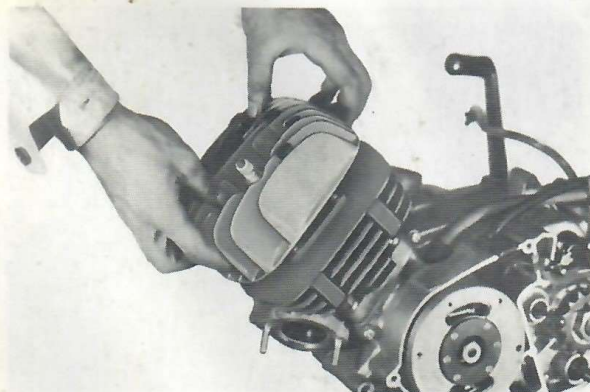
Taking off cylinder head and cylinder head gasket
